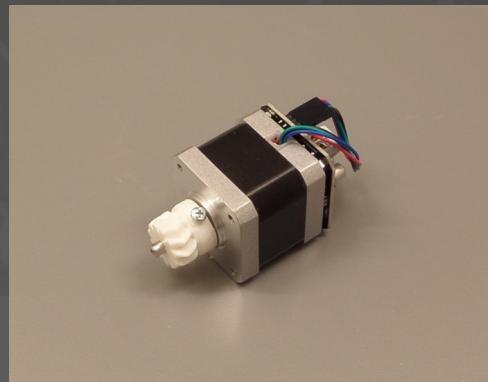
Prepare the secondary gear motor by sliding the gear onto the shaft. Remember to add M3 nut and screw to the gear.
